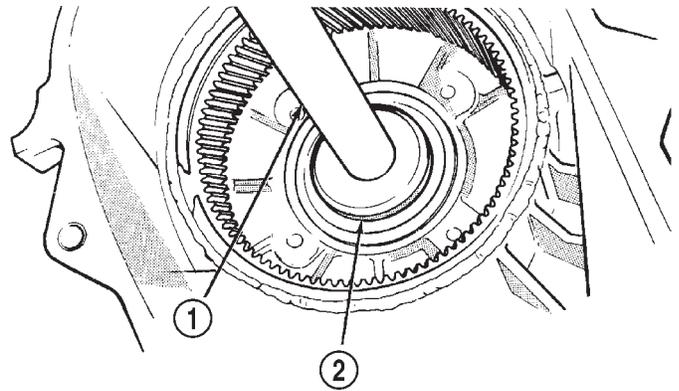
Output Shaft Rear Bearing Installation Depth
